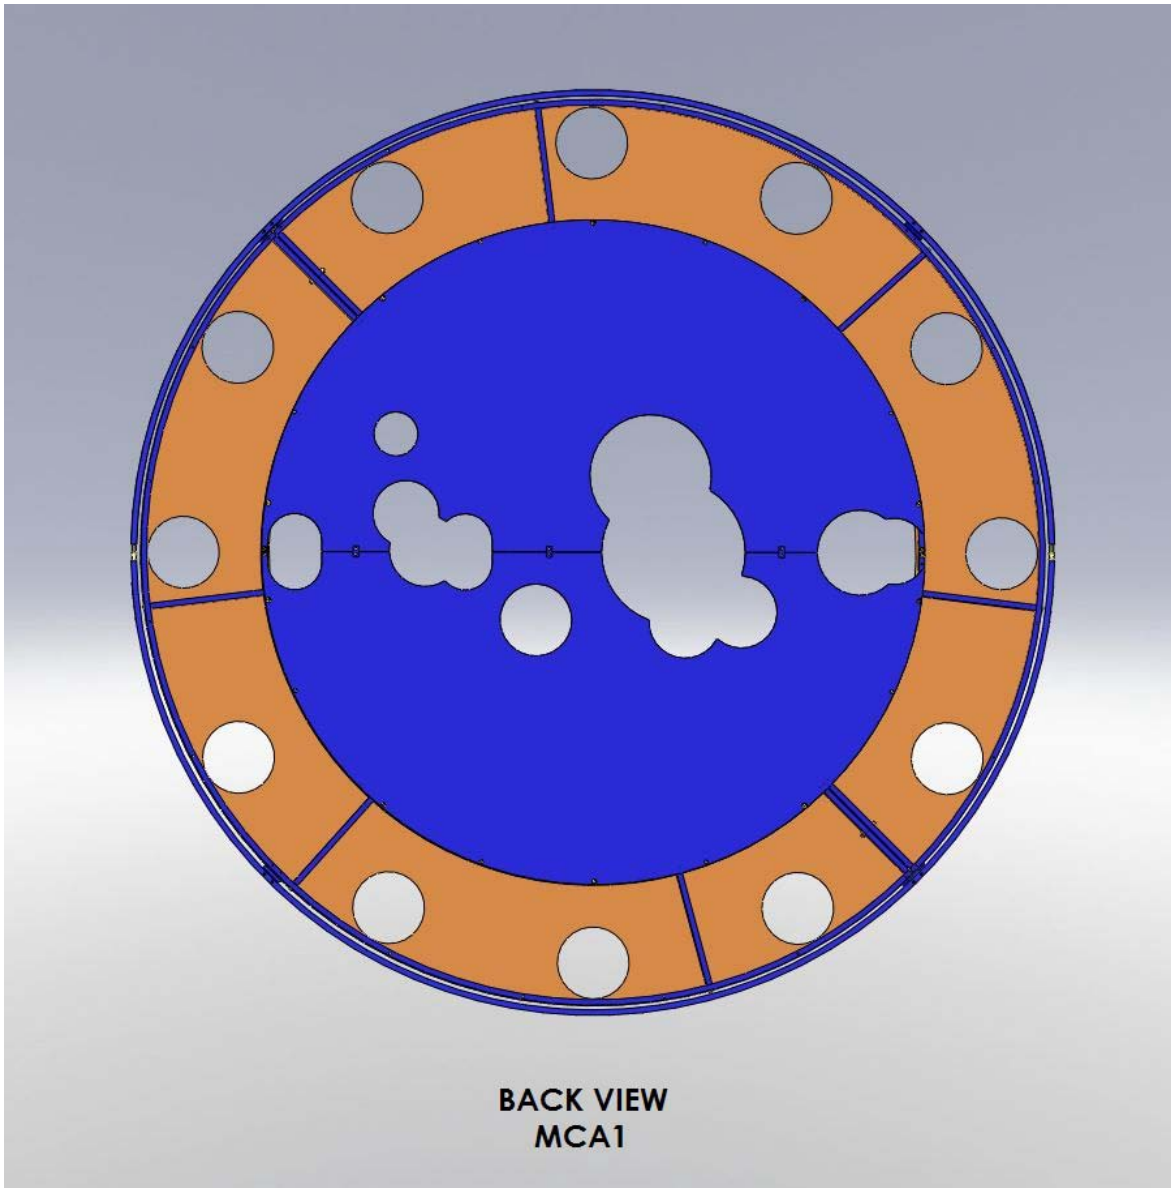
Back View of MCA1 Mode Cleaner Tube Baffle
